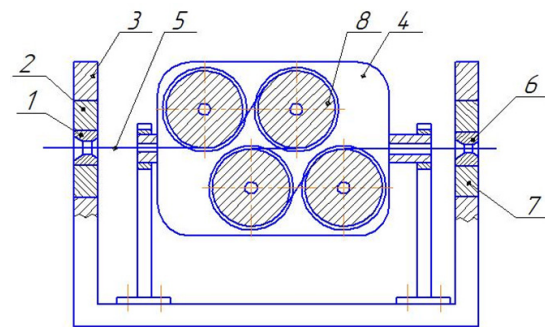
Device for implementing a continuous method for obtaining UFG wire: 1 – drawing die; 2,7 - fiber holder; 3 – frame; 4 – drive mechanism; 5 – workpiece; 6 – drawing die; 8 – roll [32].
